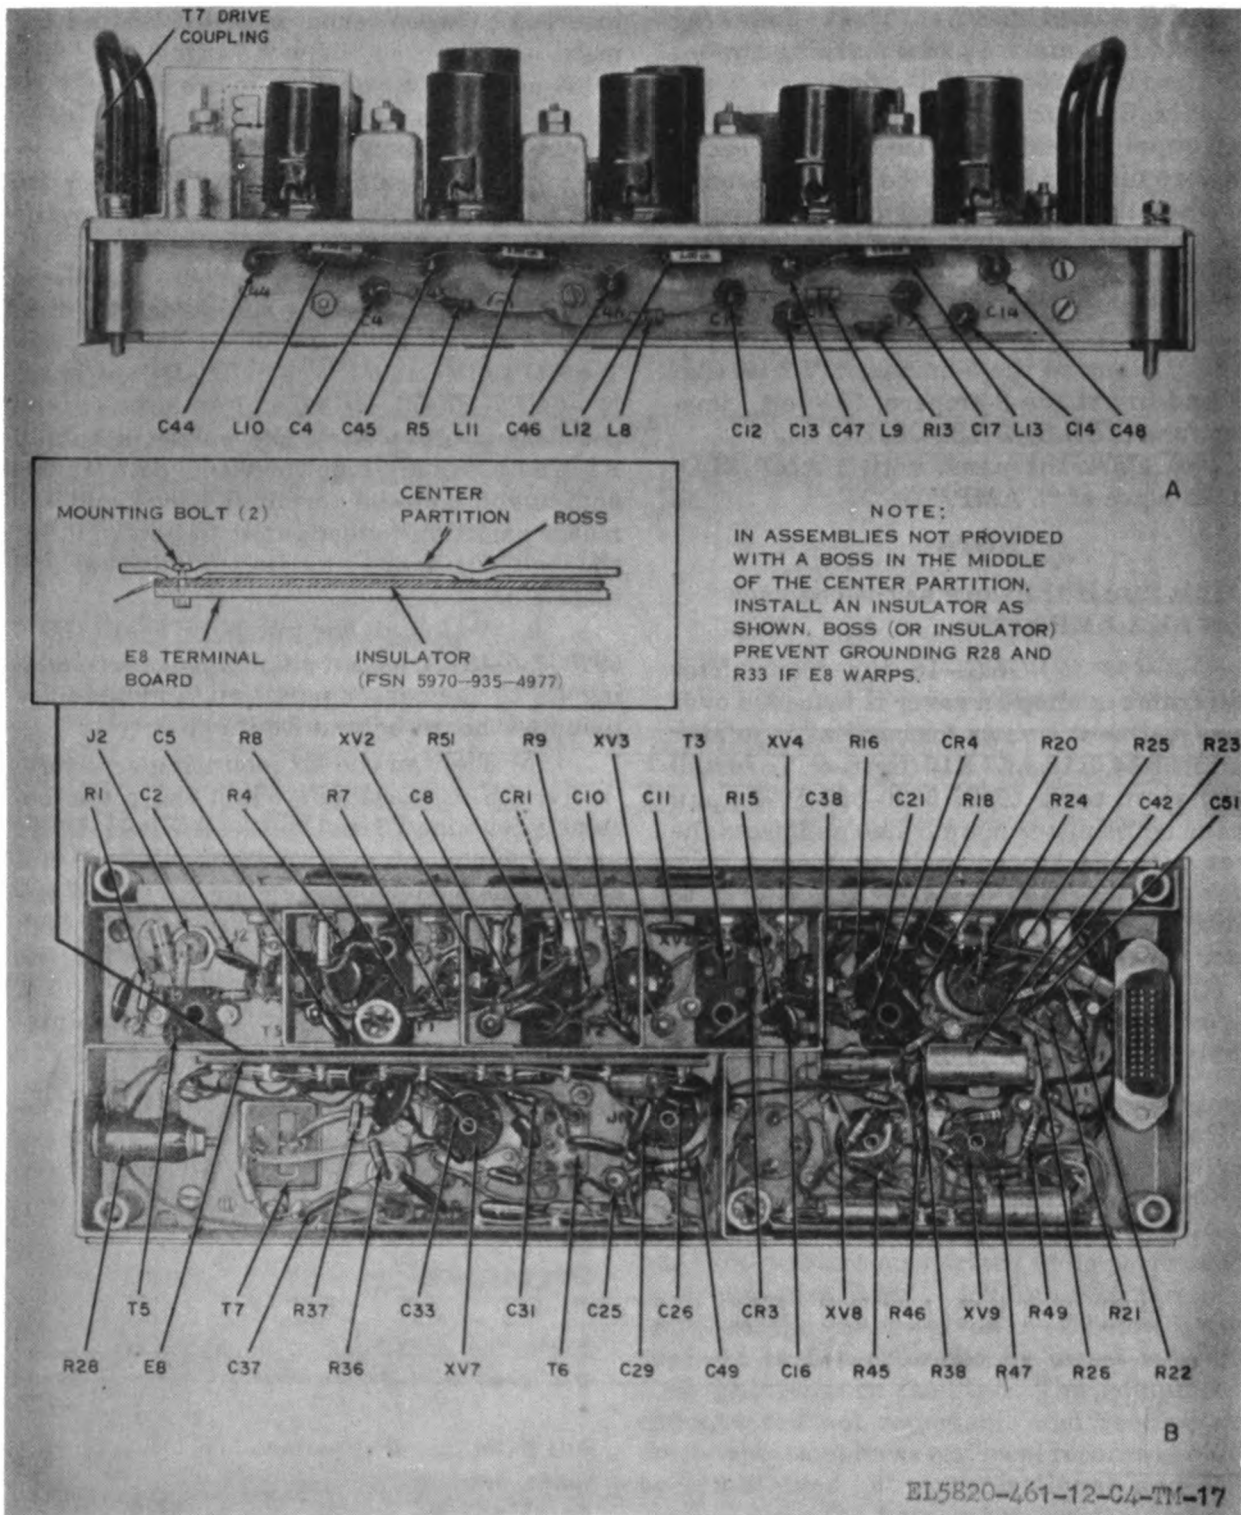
Afc assembly 2A1/3A1, side and bottom views; and details for installing insulator board behind terminal board E8.
